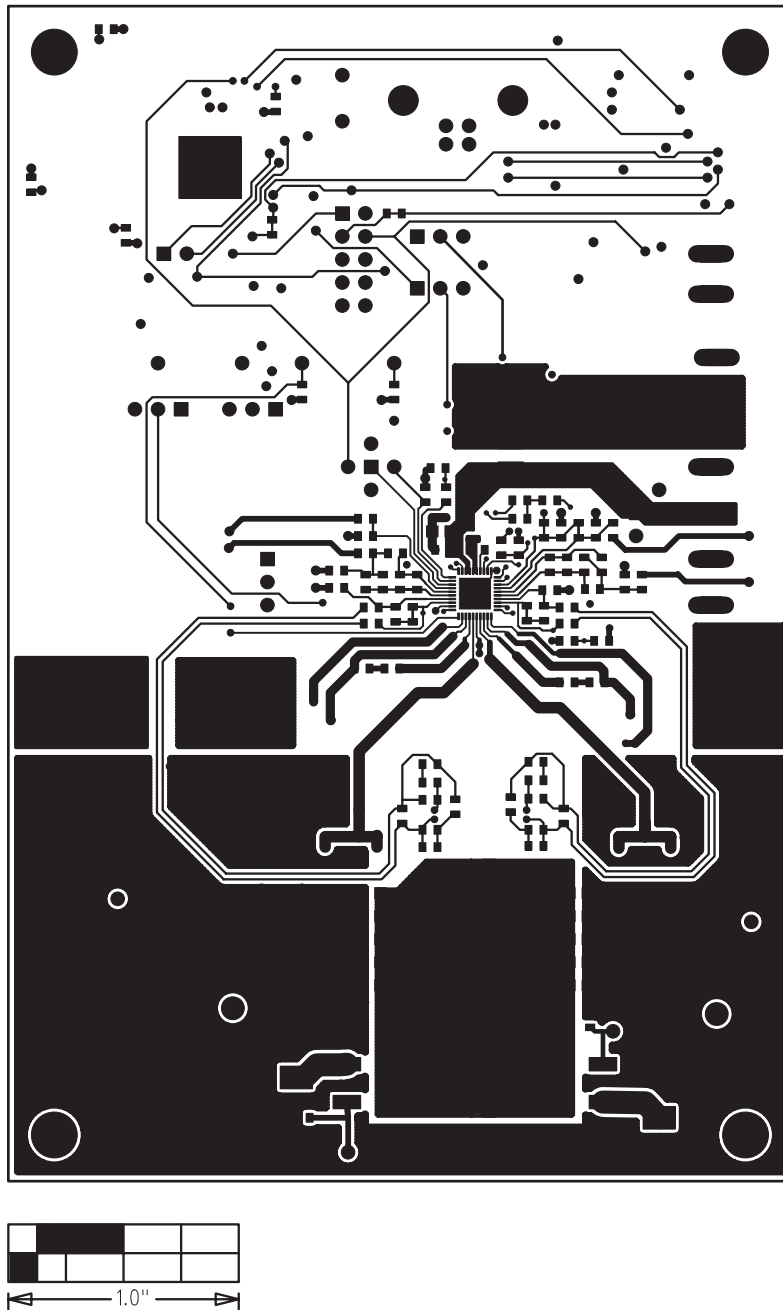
MAX17480 EV Kit PCB Layout—Solder Side
